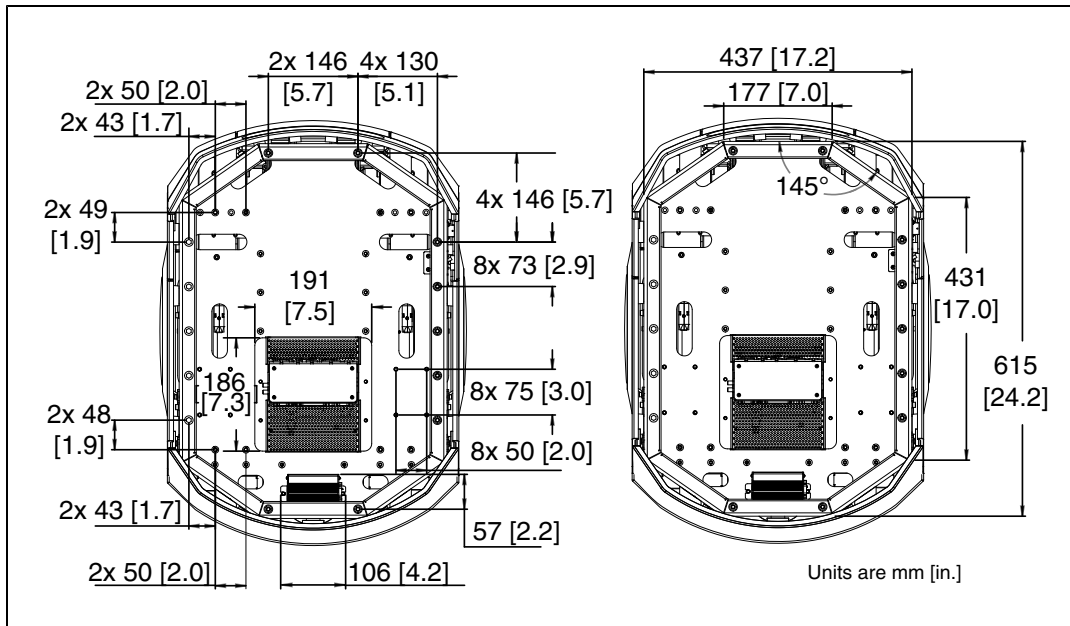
Platform Frame Dimensions, for Attaching Payload
